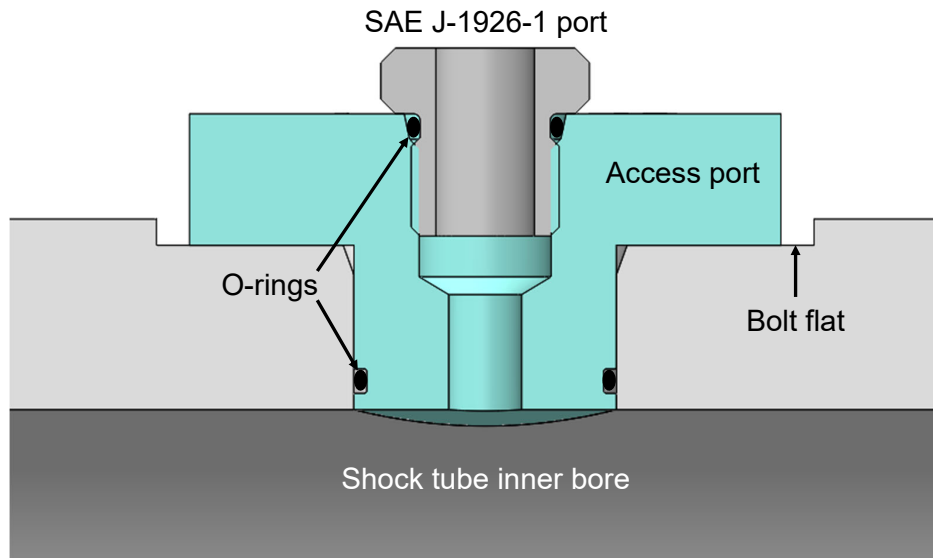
CAD cross-section of an access port, with an example of an SAE J-1926-1 strait threaded port installed.
